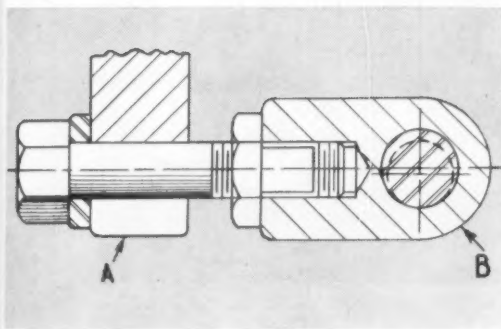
Drawing of a swinging clamp whereby actual clamping of workpieces is accomplished with the aid of an eccentric.
